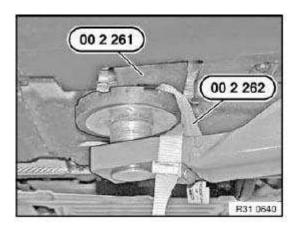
Identifying Special Tool (00 2 261) And (00 2 262) Courtesy of BMW OF NORTH AMERICA, INC.
